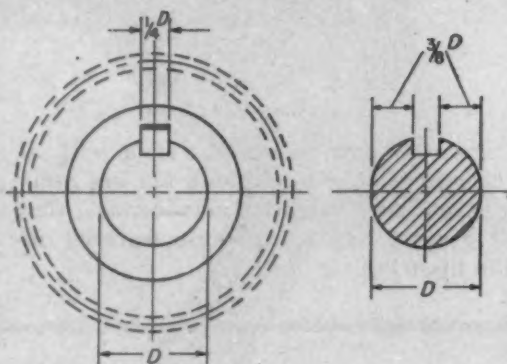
Typical keyed shaft and hole arrangement with shaft showing unequal area of fit
